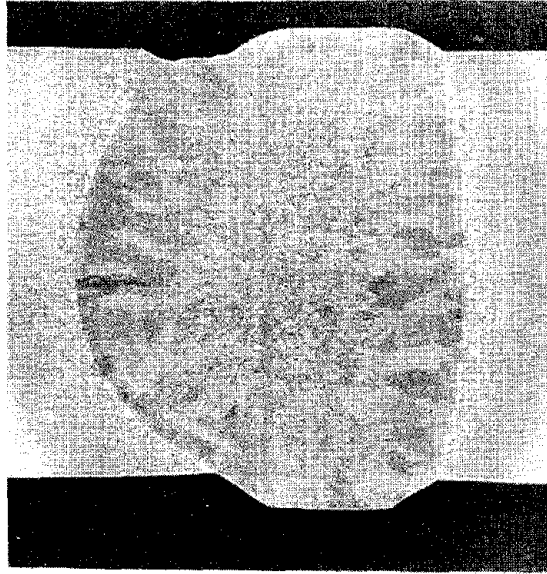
Underfill resulting from an excessive voltage and improper guide tube position nearer one side of the weld joint.
